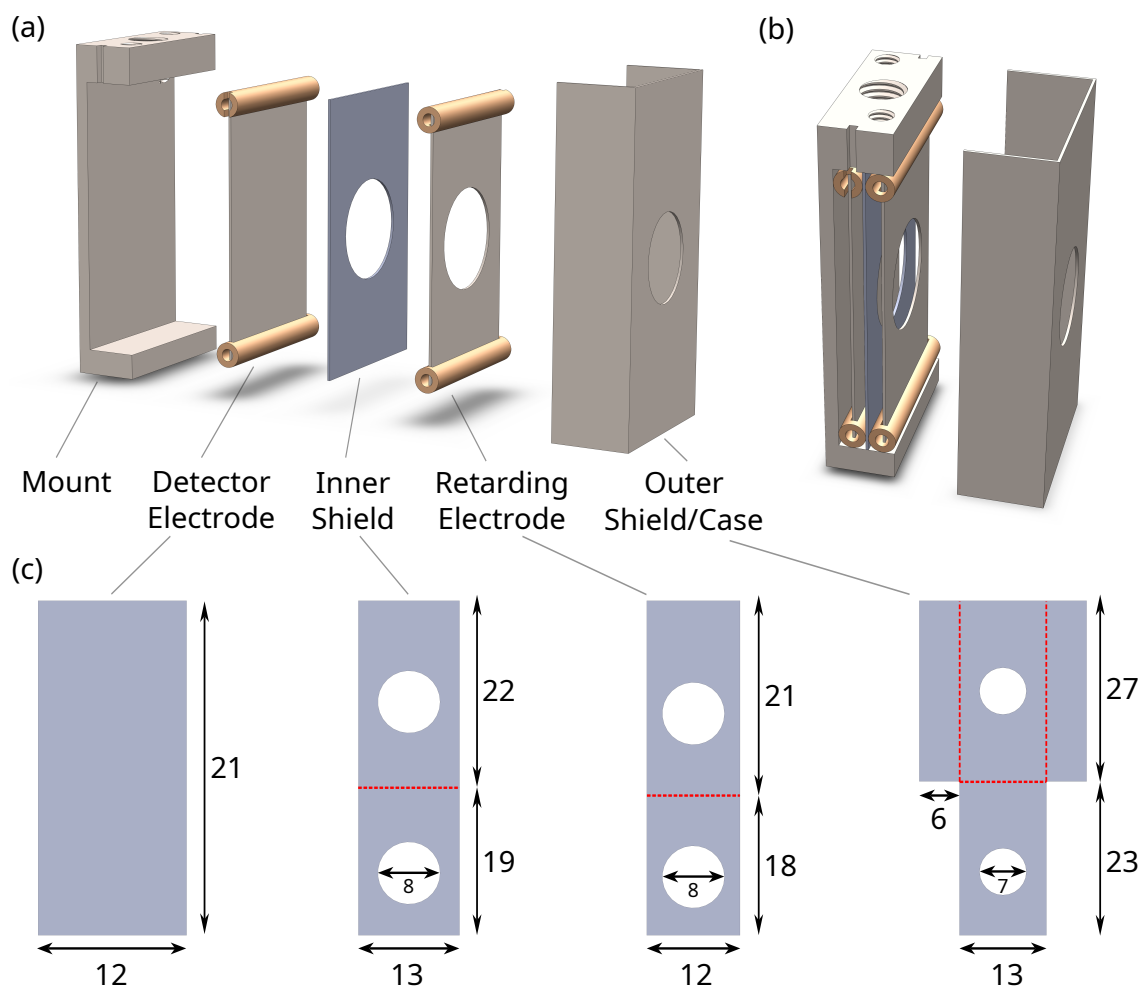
Computer-assisted design (CAD) drawings of the single-electrode Faraday cup. (a) Fully exploded view, (b) Assembled with the cover removed, (c) Layouts of the detector electrode, inner shield, retarding electrode and outer shield/case. The parts in (c) were cut out of a Ta foil with 0.1 mm thickness, folded along the dotted red lines, hole-punched and spot-welded together with copper grids between the folded halves. All size specifications in mm.
